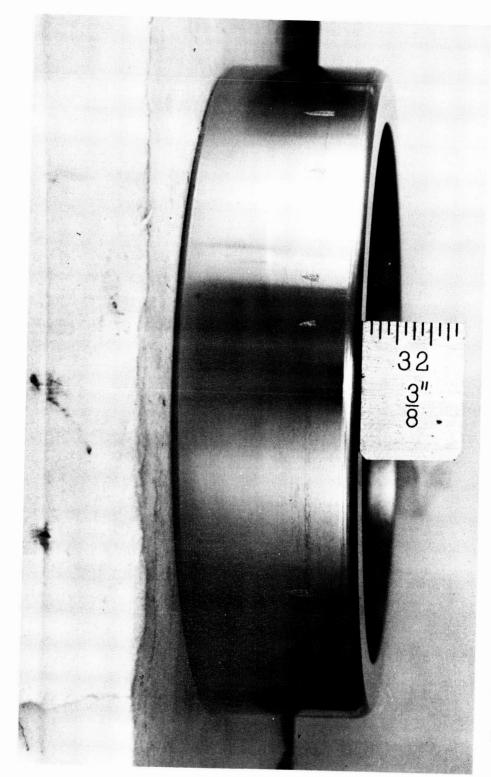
SNAP-8 mercury pump after vibration testing. Pump end bearing outer ring showing galls and scratches.
